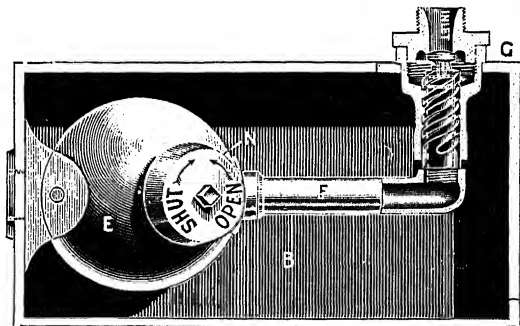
Lancaster Steam Trap : Old Type—Plan with Cover Removed.
